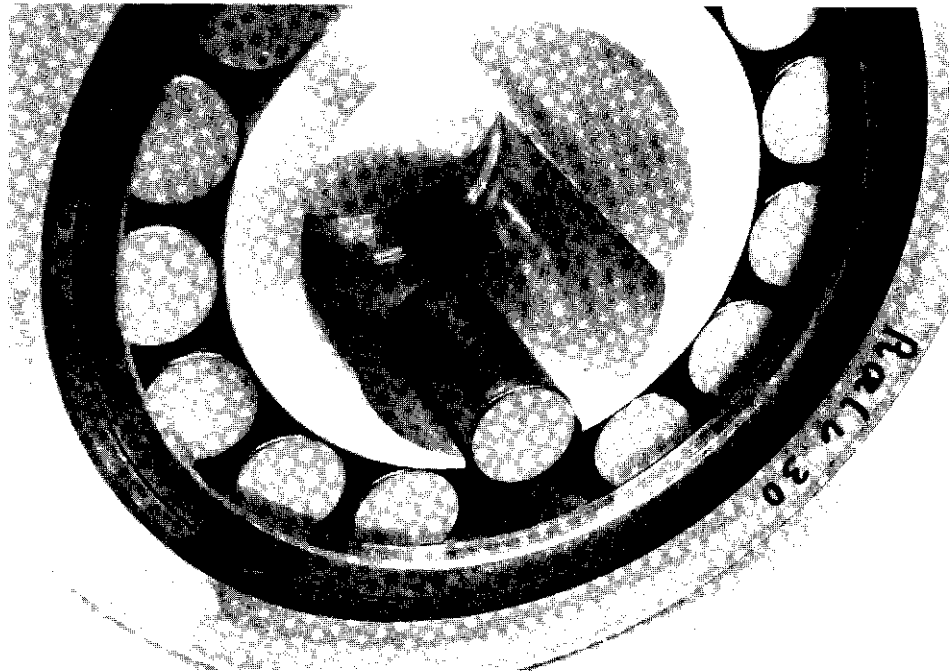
Assembly procedure of rolling elements using auxiliary inner ring.
